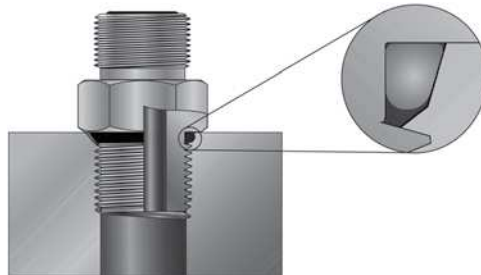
SAE / ISO / JIS B2351 Straight Thread Port O-Ring Upon Assembly. Source: Assembly/Installation section of [64].
